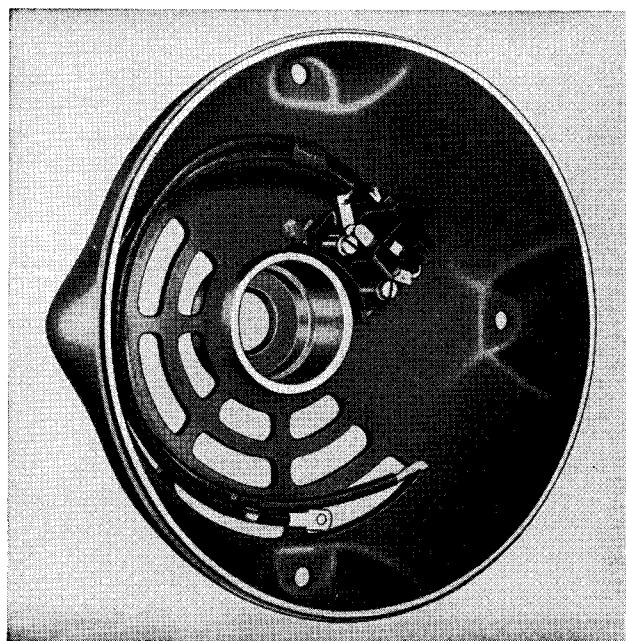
Front Bracket Showing the Contacts Part of the Centrifugal Switch
